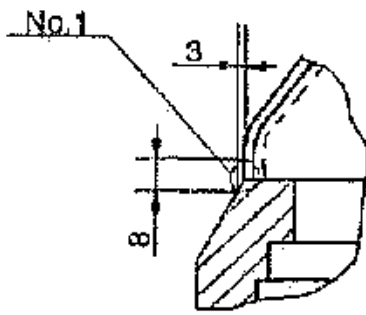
FIGURE: HOUSING TO DRG. NO. 172.10.075CBCB
